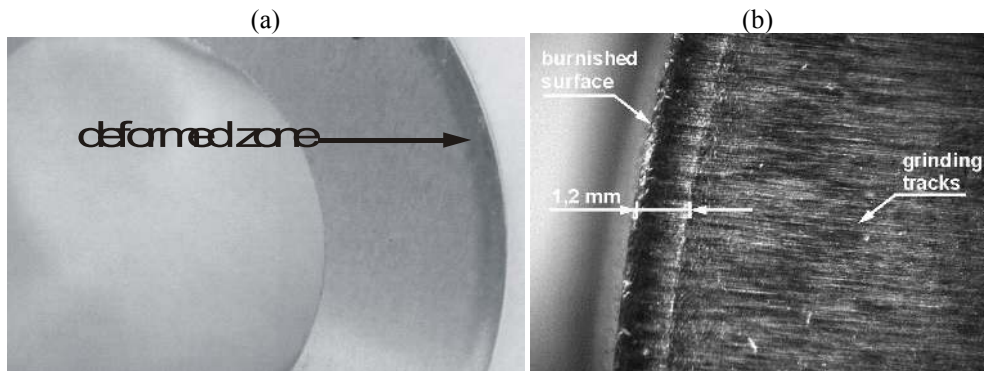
View of the ring after dismantling: (a) face of the ring with a deformed layer, (b) photograph of face of rings no. 3 after burnishing with a pressure force $F = 3$ kN, deformed zone 1.2 mm.
